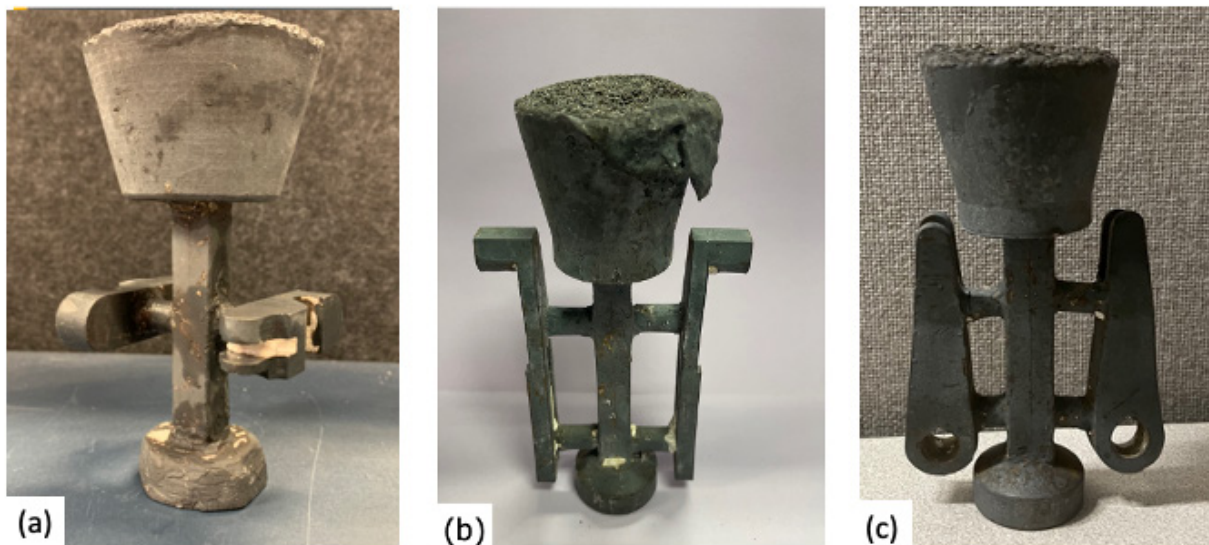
As-cast casting trees (a) Part#12314649 casting tree assembly; (b) Part#12446263 casting tree assembly; (c) Part#154072 casting tree assembly.
